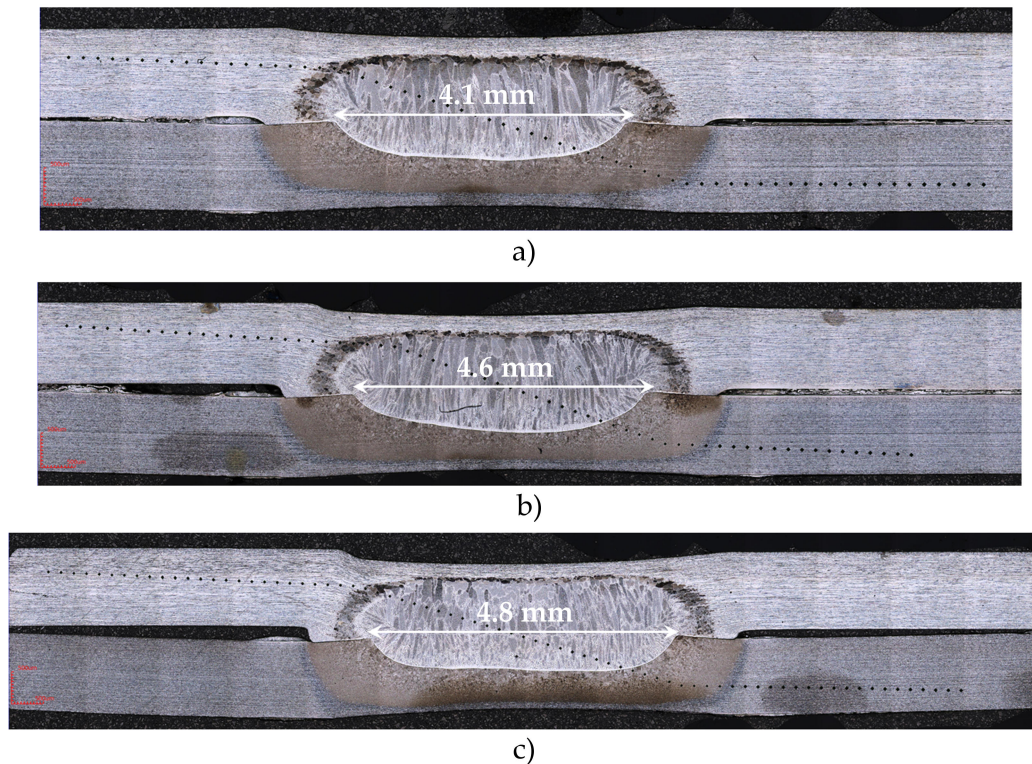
Spot weld metallographic cross sections of Duplex 8Al/DP600 spot welds at the three positions in the welding range (Duplex 8Al is always the upper sheet): a) lower end, b) middle position, c) upper end.
